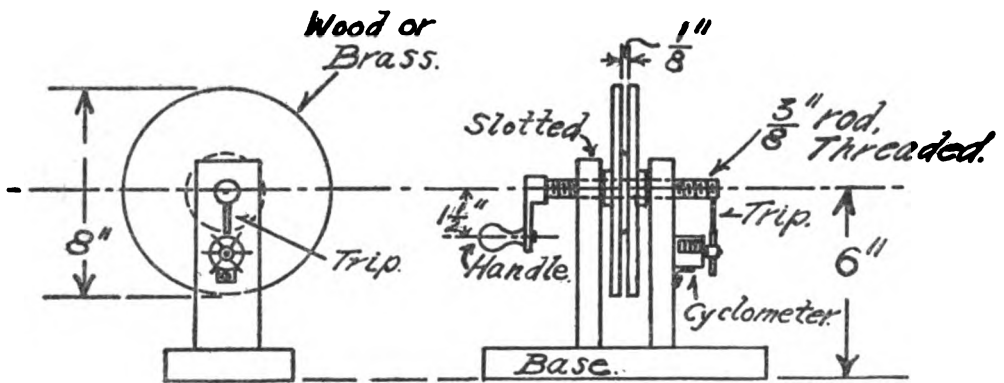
WORKING DRAWING FOR CONSTRUCTING A WINDING MACHINE FOR MAKING SECONDARY SECTIONS
